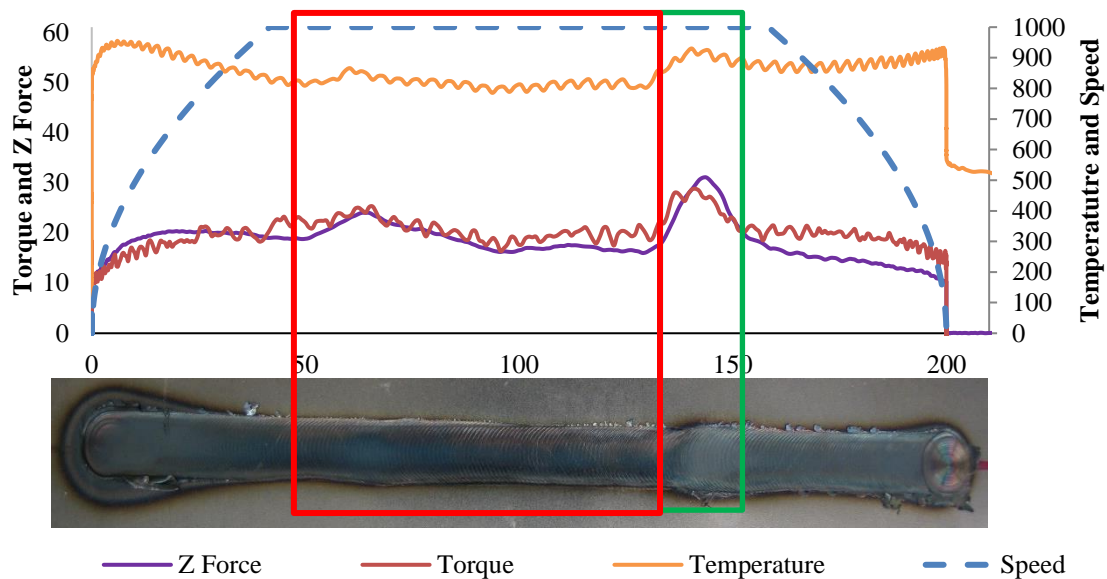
Weld produced with a PL12 tool at 1000 mm/min and 1000 rpm.
